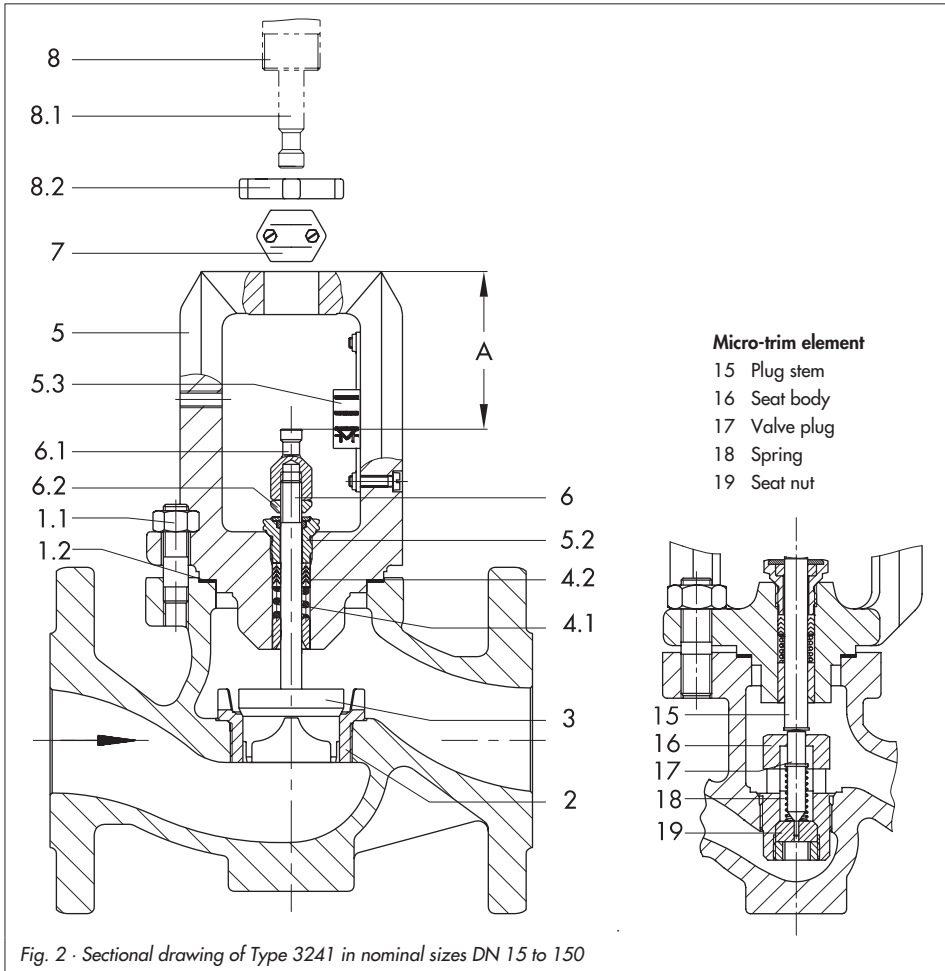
· Sectional drawing of Type 3241 in nominal sizes DN 15 to 150
